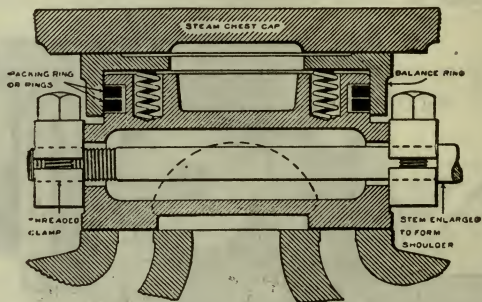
Sectional view of Houston Stanwood and Gamble balanced slide valve. It is held against the seat by steam pressure on a small area of the back of the valve and by this means is made nearly steam tight. Also, the valve by this means is made to automatically follow up its wear, so that the steam consumption will be lower after the engine has been in use for a time, rather than higher.
